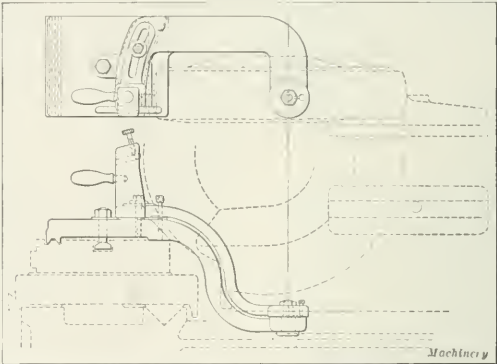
Wheel Truing Device used in connection with Rifle Barrel Grinding Attachment
